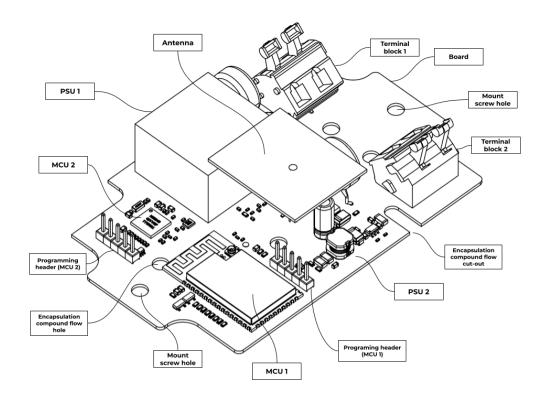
Printed circuit board parts (encapsulation compound not shown).
